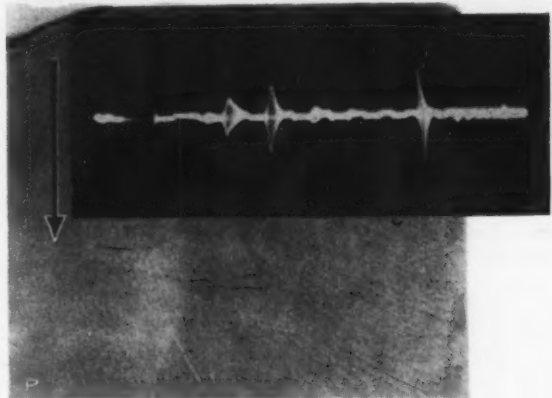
Defects in a bucket wheel hub and the oscilloscope of the defects.
